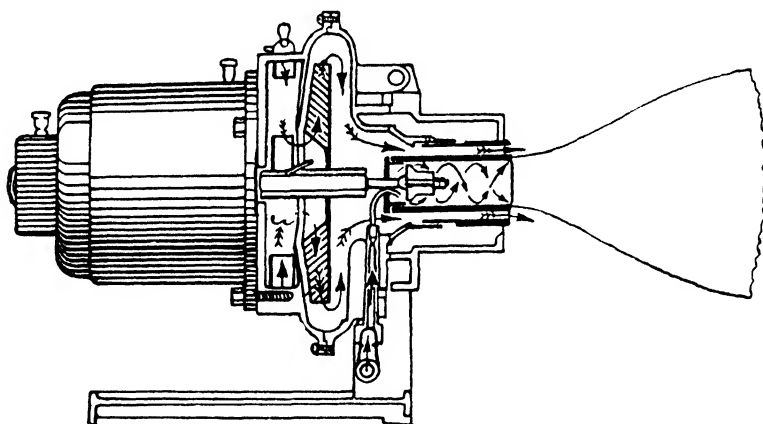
HORIZONTAL ROTATING-CUP OIL BURNER
